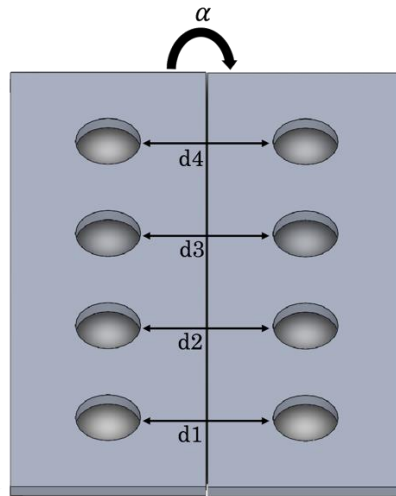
Parts after welding with distances and angle
